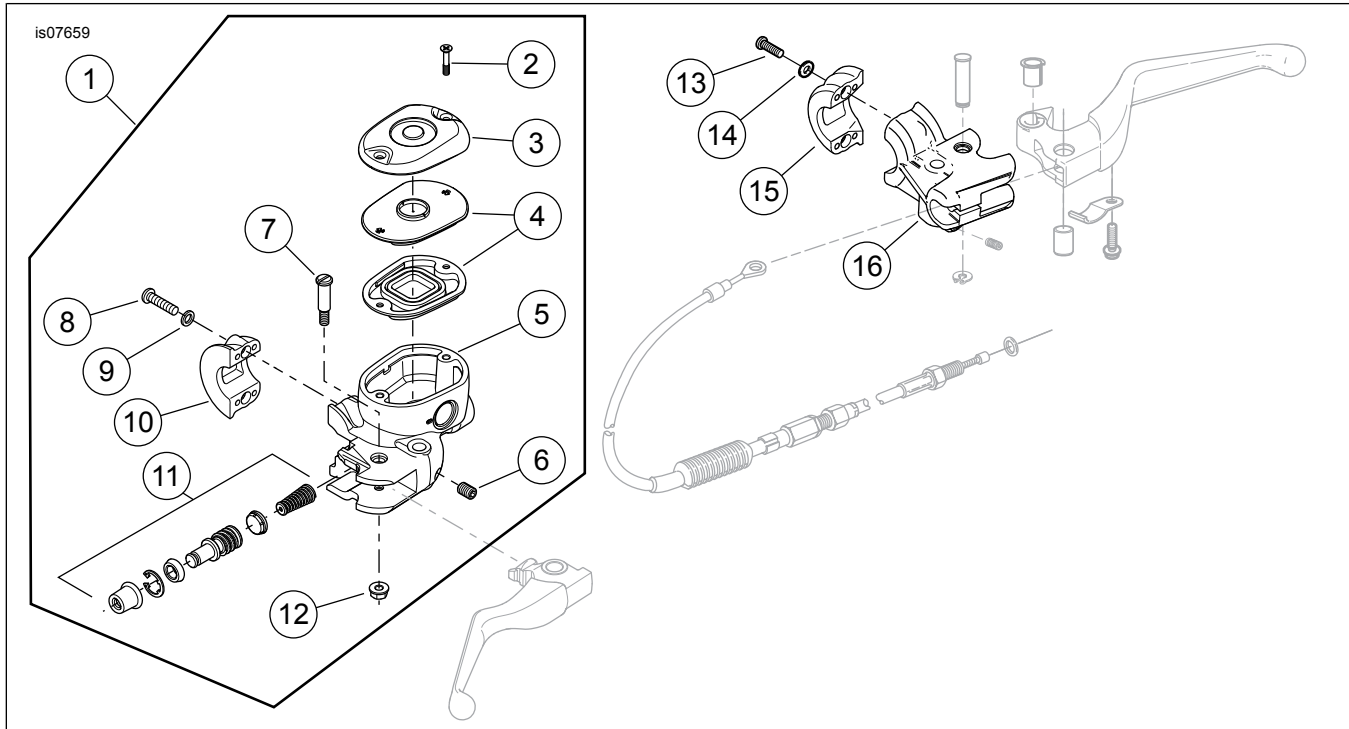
Service Parts: XL Chrome Master Cylinder and Clutch Bracket Kit
